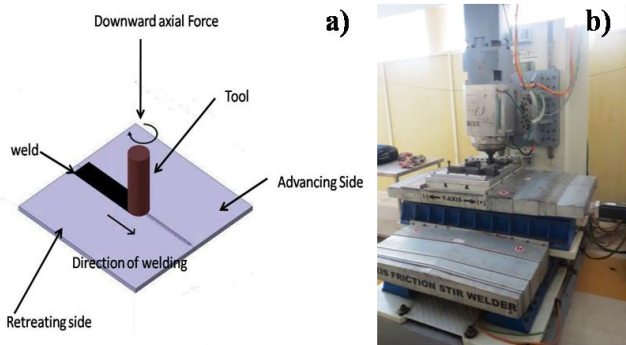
a) Schematic of friction stir welding process b) FSW machine
